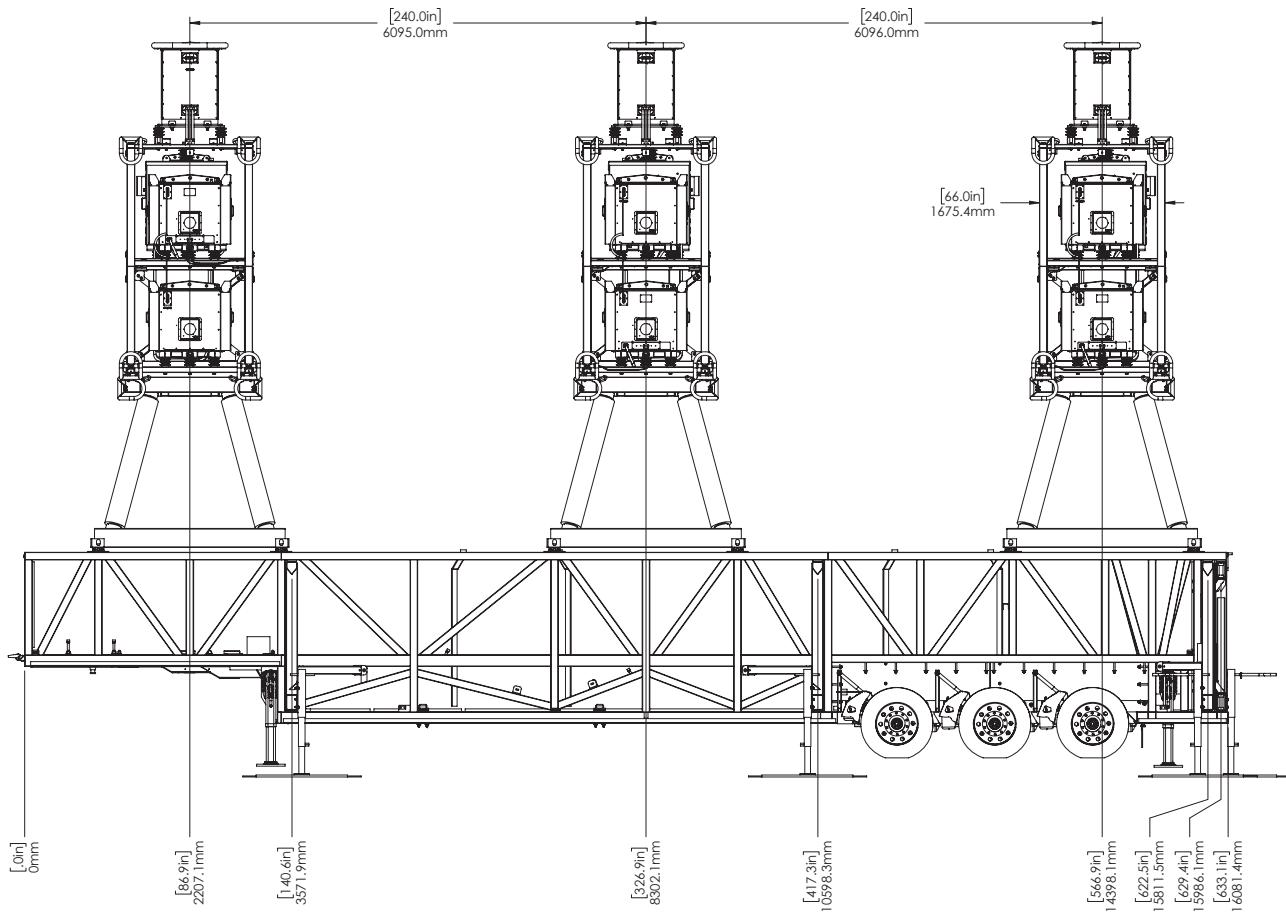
Mobile SmartValve Unit – Deployment Configuration Side View
